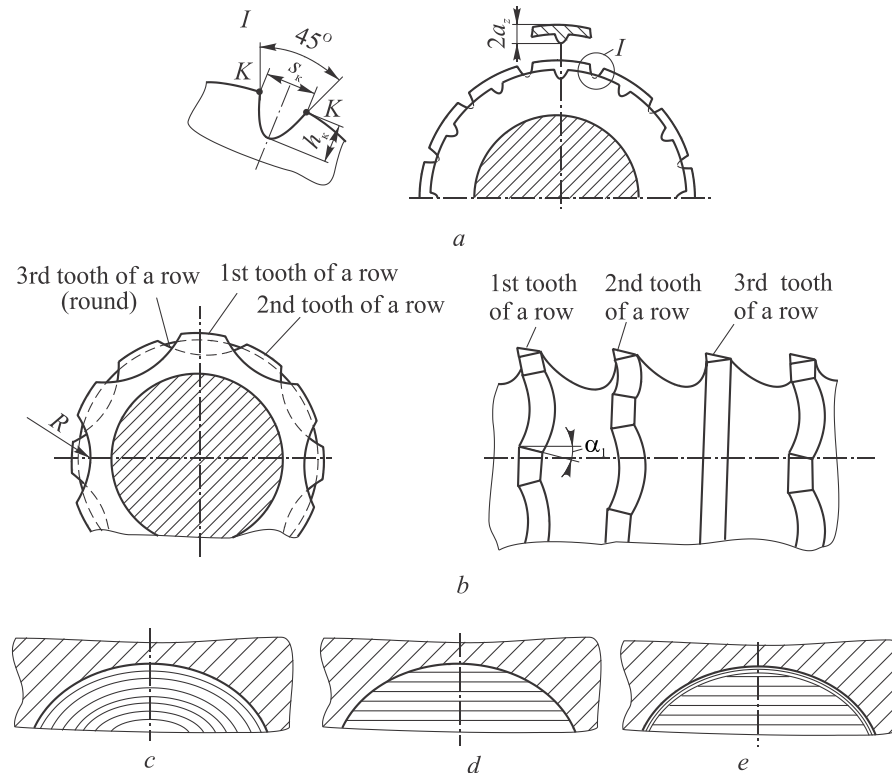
Cutting patterns of broaching: (a) standard; (b) rotor-cut; (c) full-form; (d) generating; (e) combination
